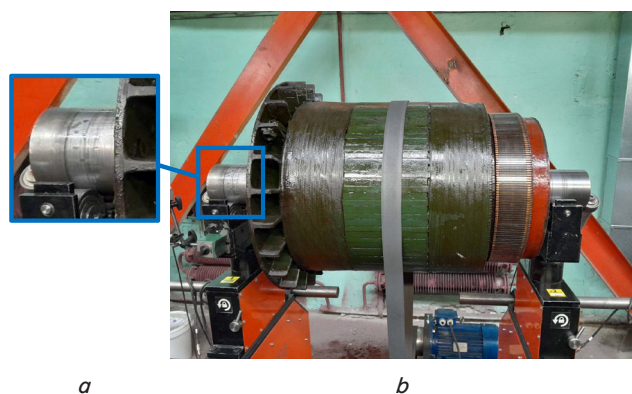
The RT-51D electric motor rotor installed on the EI-2000 balancing machine: *a* – general view of the rotor support surface with visible damage to the rolling support surfaces; *b* – installation of the rotor on supports
